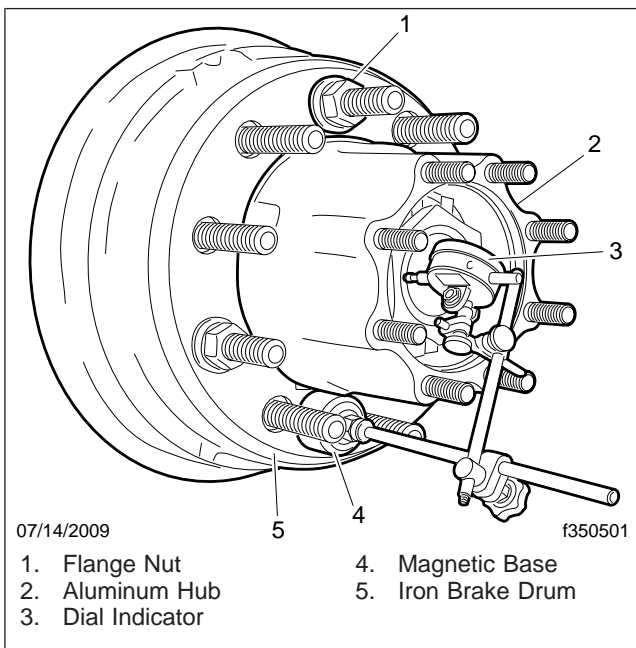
, Dial Indicator Setup, Aluminum Hub with Iron Brake Drum
